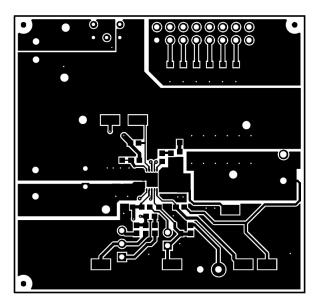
TPS53317AEVM-726 Top Copper (Top View)
